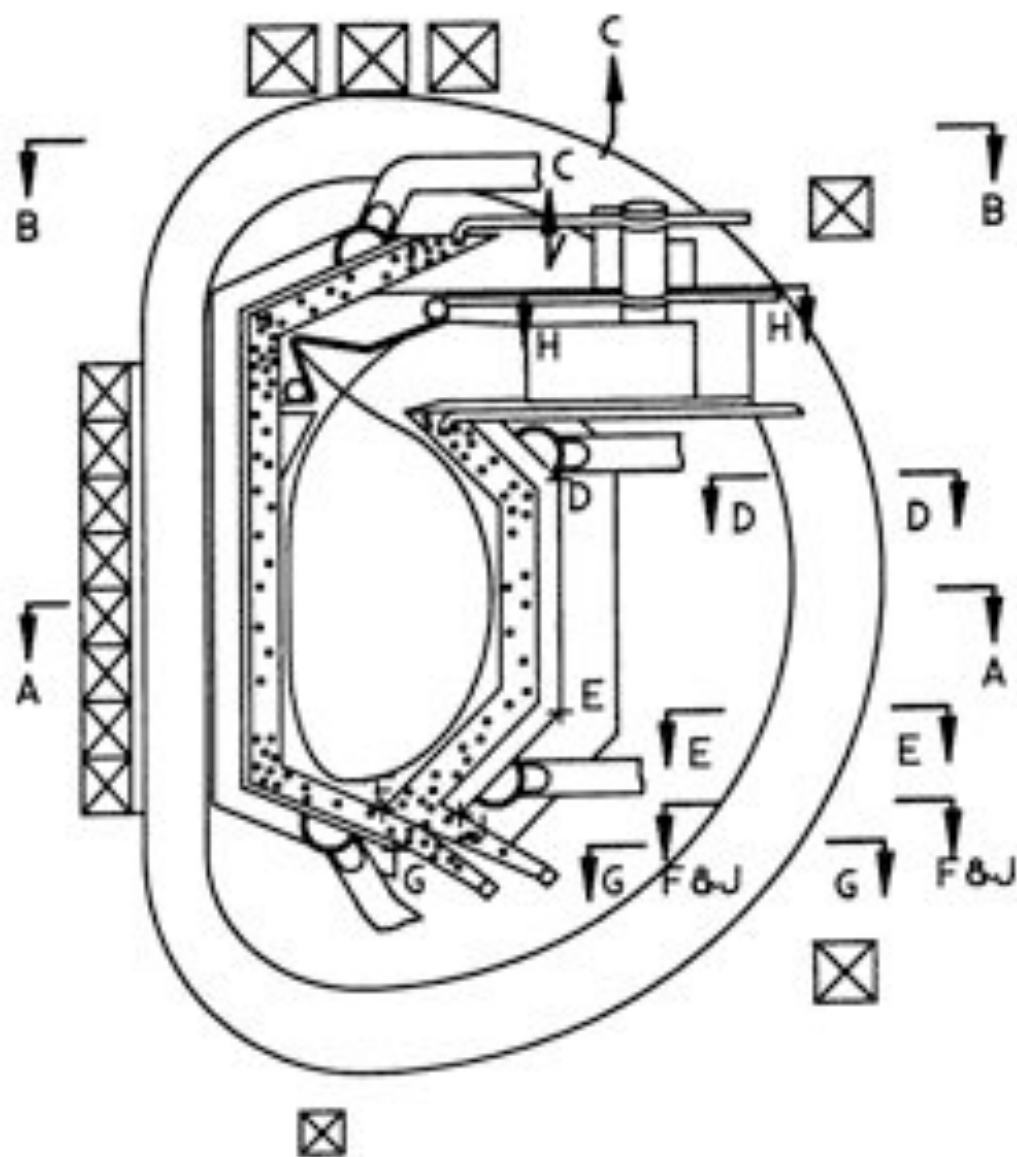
Cross section elevation view of helium cooled blanket concept with top mounted divertor with typical sections used to determine clearance for blanket.
